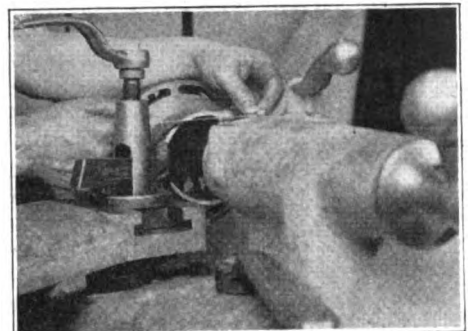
Radial Cut Testing for Flatness With Six-Inch Rule.
